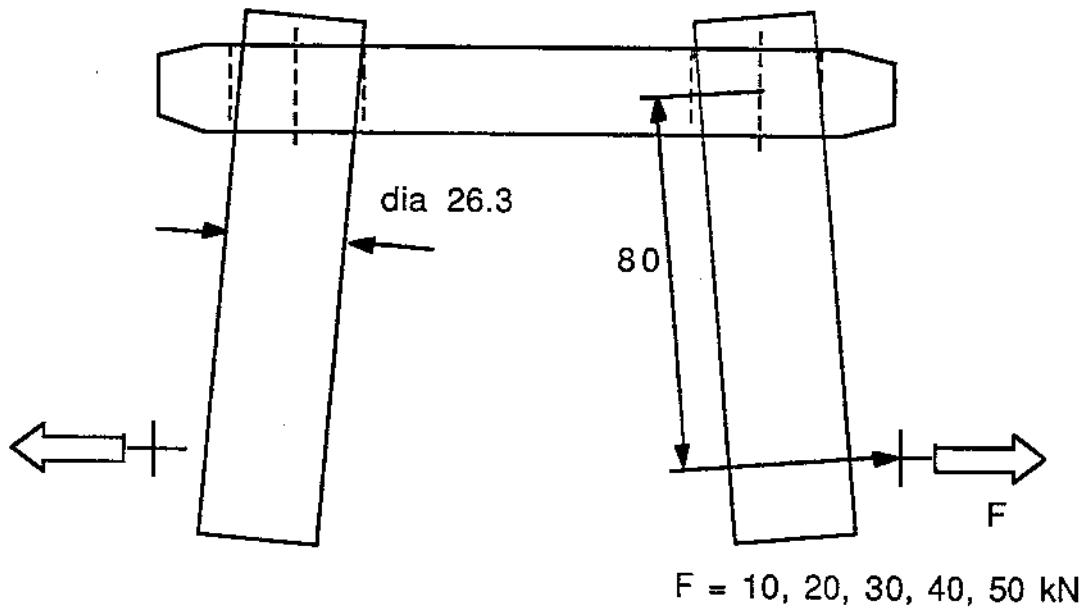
TEST SPECIMEN AND TEST ARRANGEMENT
